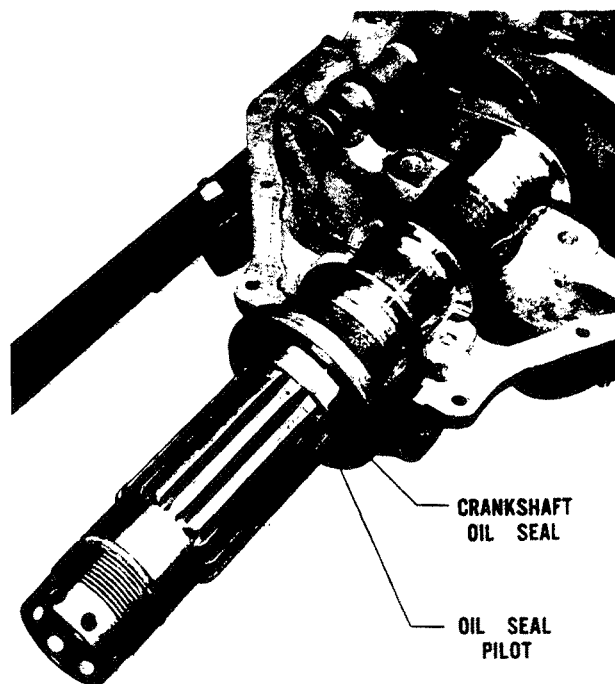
INSTALLING CRANKSHAFT OIL SEAL.
